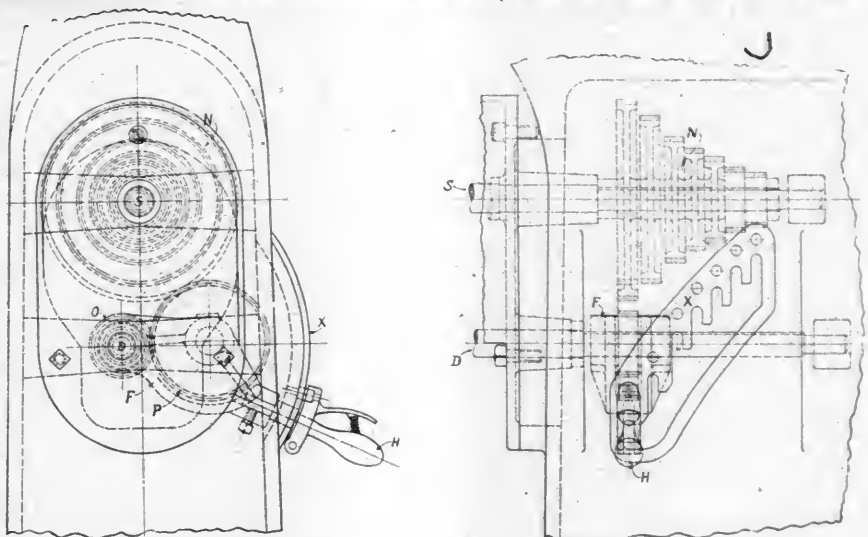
DETAILS OF THE VARIABLE-SPEED FEED MECHANISM APPLIED TO THE HENDEY-NORTON MILLING MACHINE.
